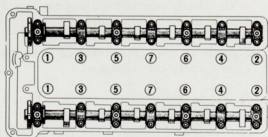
Camshaft Bearing Caps Removal Y5192
